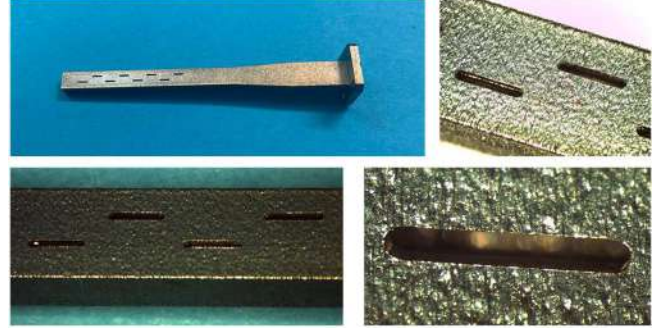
The fabricated 3D metal printed antenna and its enlarged views.
